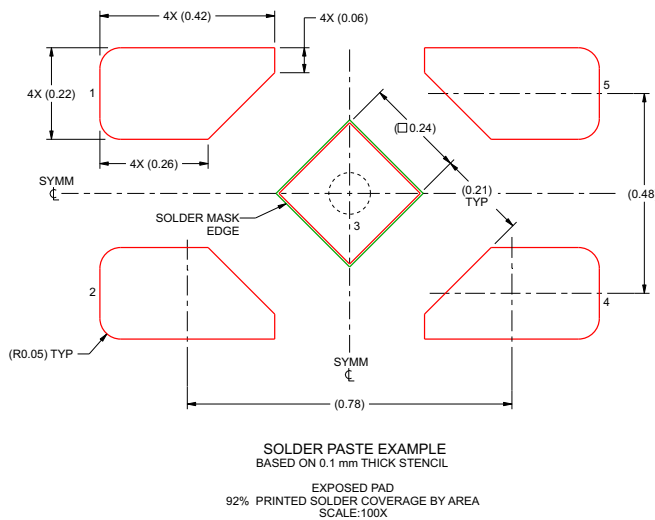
X2SON-5 (DPW) Package Solder Stencil Example
